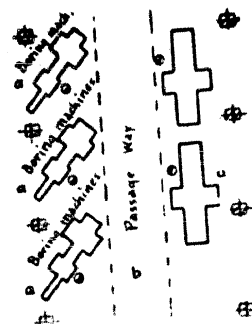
Placement of Boring Machines at an Angle and Along the Aisle
